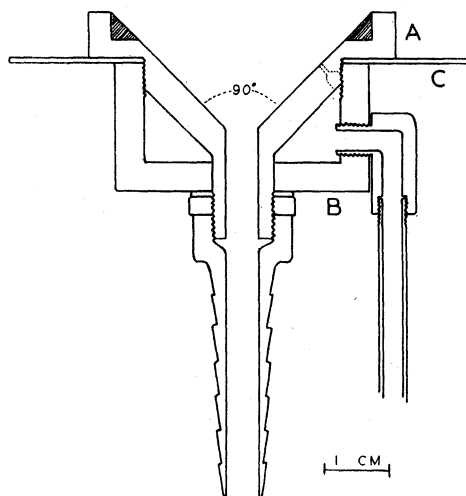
Alternative stator with adjustable central inlet for allowing air partially to relieve the vacuum below the rotor.
